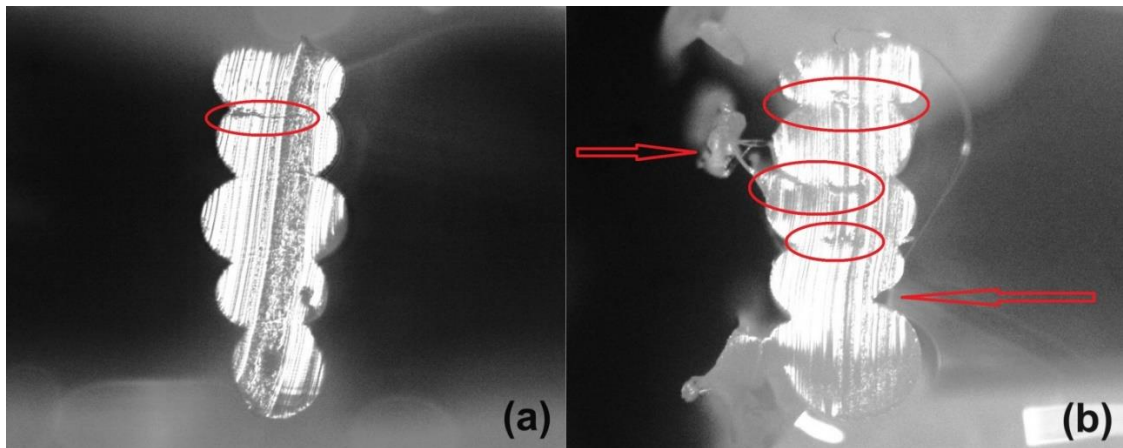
Cross-sectional view of specimens printed with (a) 20 mm/s and (b) 40 mm/s.
